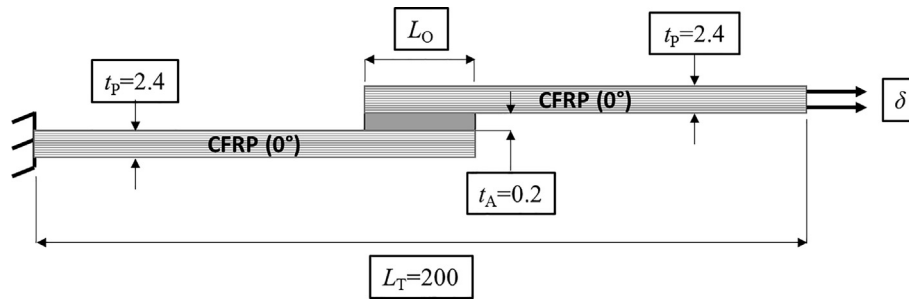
SLJ geometry and respective dimensional parameters (in mm).
